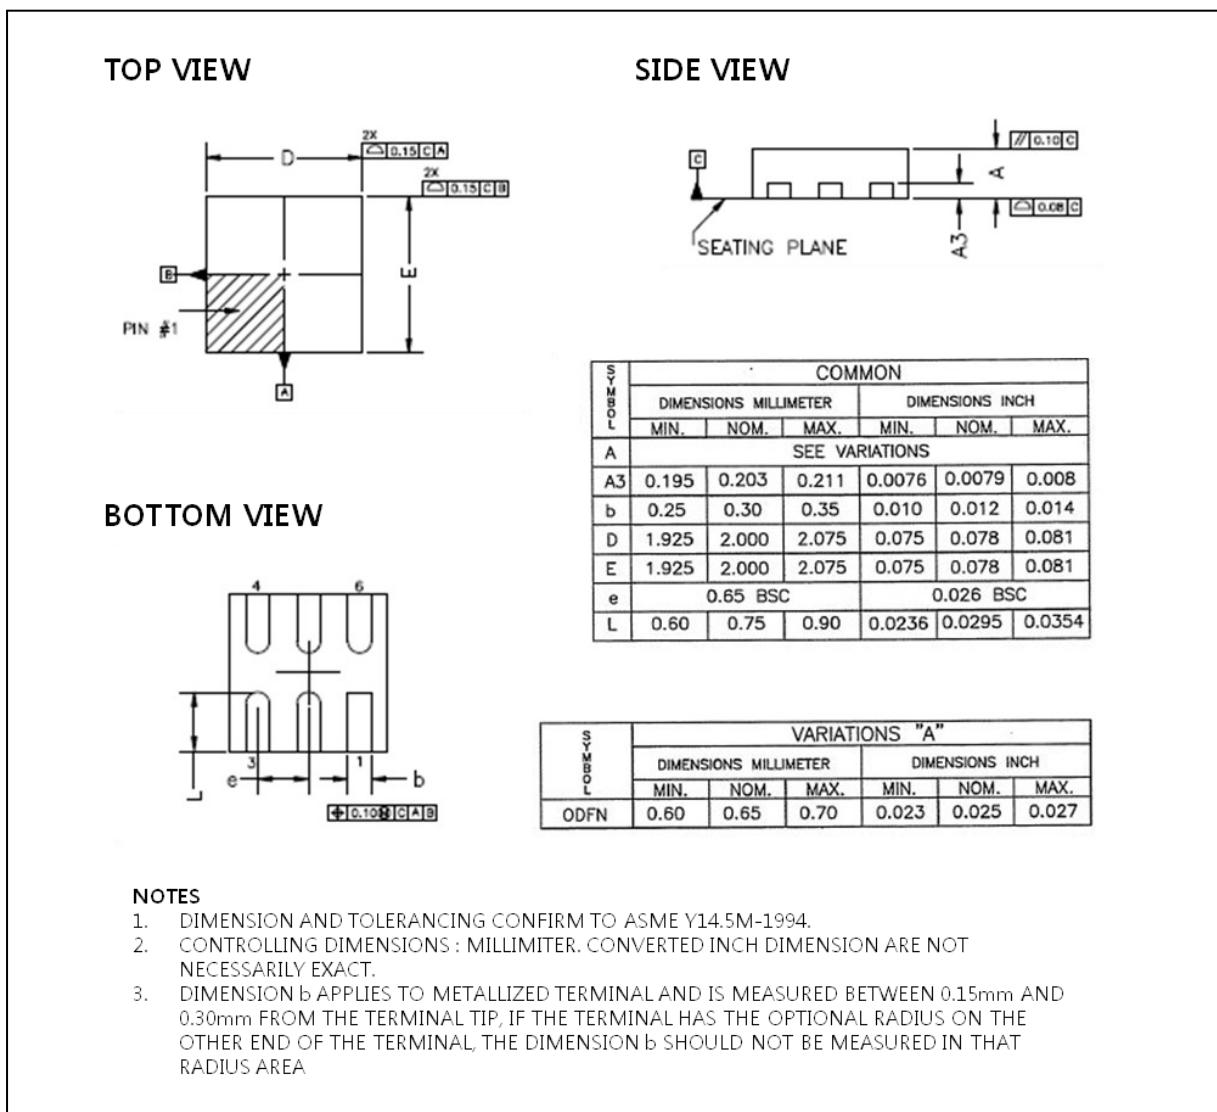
Package Dimension – ODFN 2X2 6L(COL)
